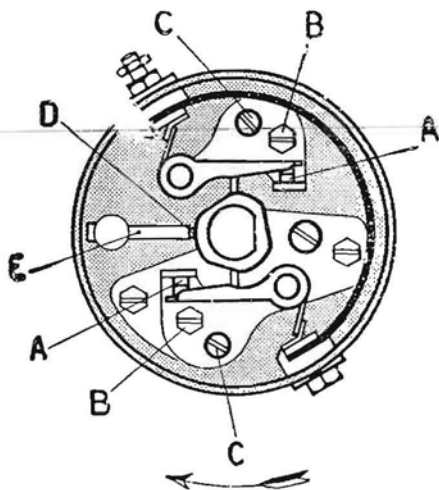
PLAN VIEW OF DOUBLE LEVER TYPE DISTRIBUTOR.
